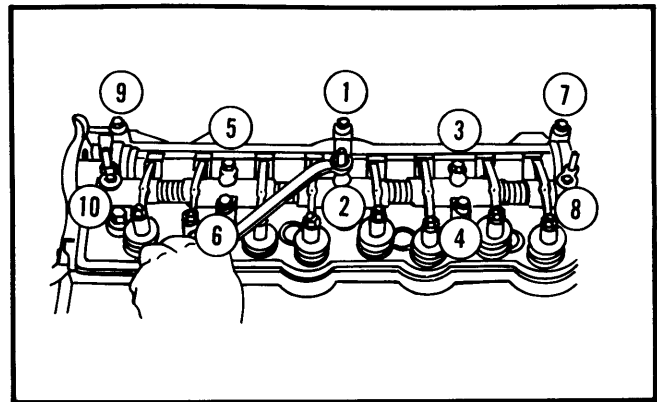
Rocker Arm Assembly Tightening Sequence (Loosen in Reverse Order to Disassemble)
